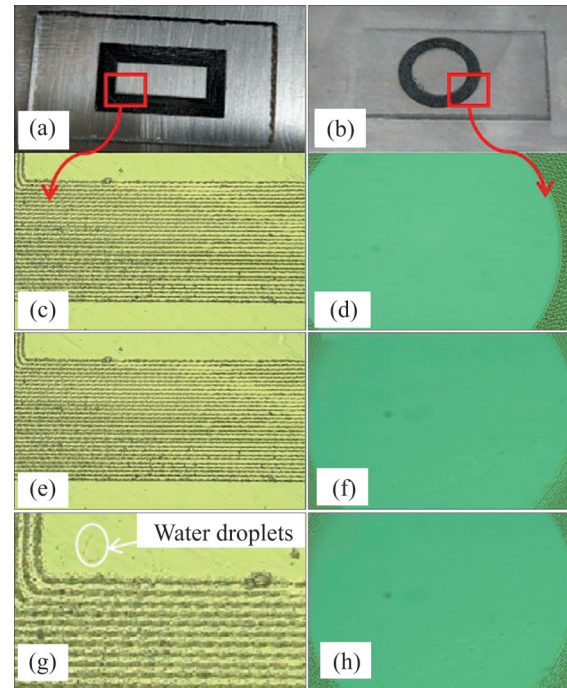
(a) Rectangular seal weld sample; (b) Ring seal weld sample; (c) Optical microscope images of rectangular seal weld sample; (d) Optical microscope images of ring seal weld sample; (e) Optical microscope images of rectangular seal of the sample in water for 2 h; (f) Optical microscope images of ring seal of the sample in water for 2 h; (g) Optical microscope images of the rectangular seal of the sample in water for 72 h; (h) Optical microscope images of ring seal of the sample in water after one week
